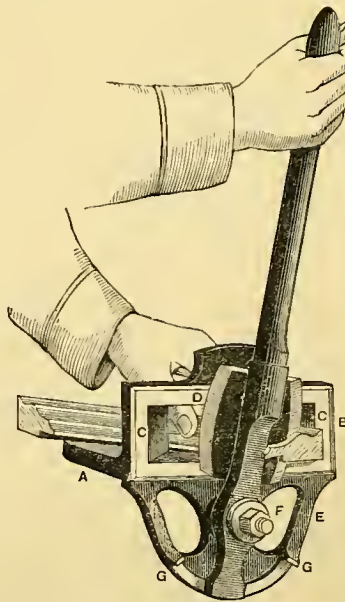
BOOTH'S MITRE-CUTTING MACHINE.
